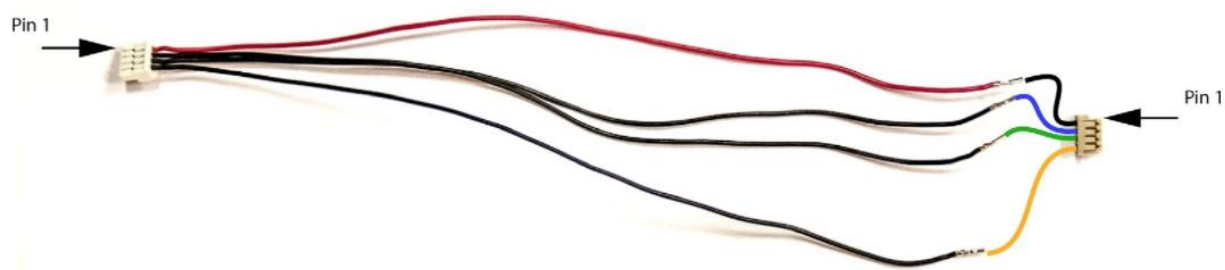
Soldering of TeraRange I2C adapter to Pixhawk 2.1 port pins
